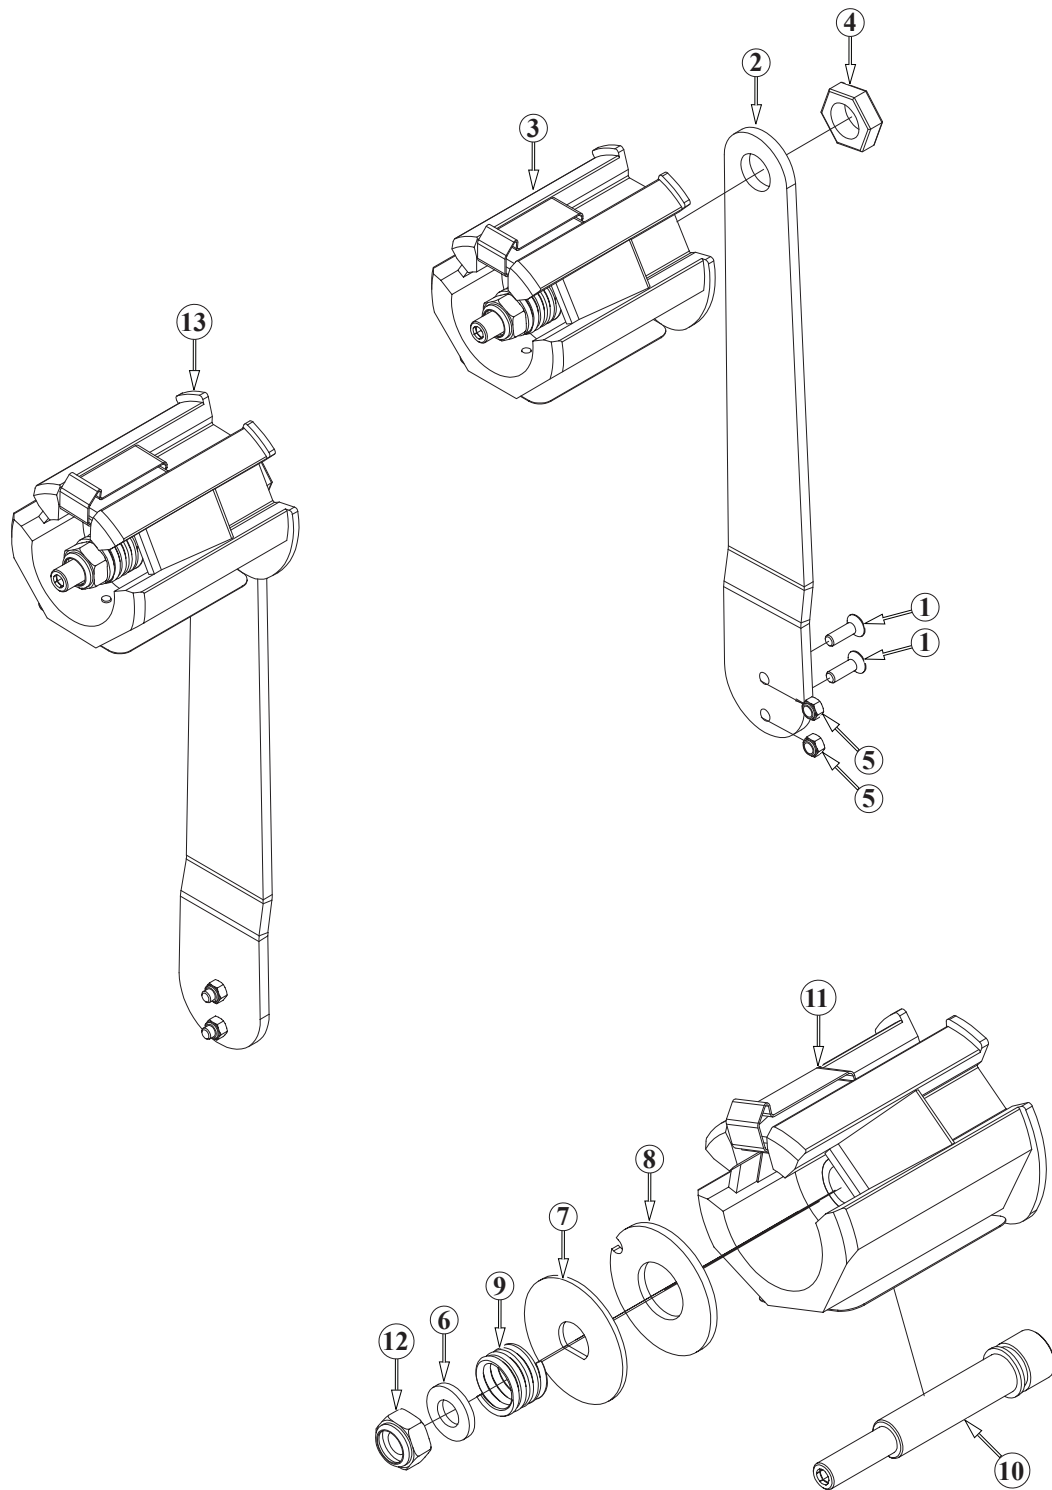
Upper and Lower Taping Head - Taping Head Assembly
